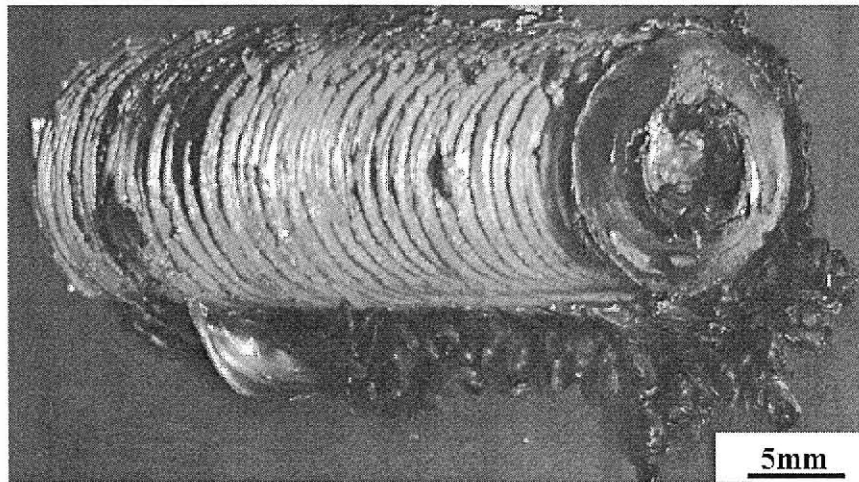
Appearance of friction stir welded specimen at 200rpm and 200mm/min.
